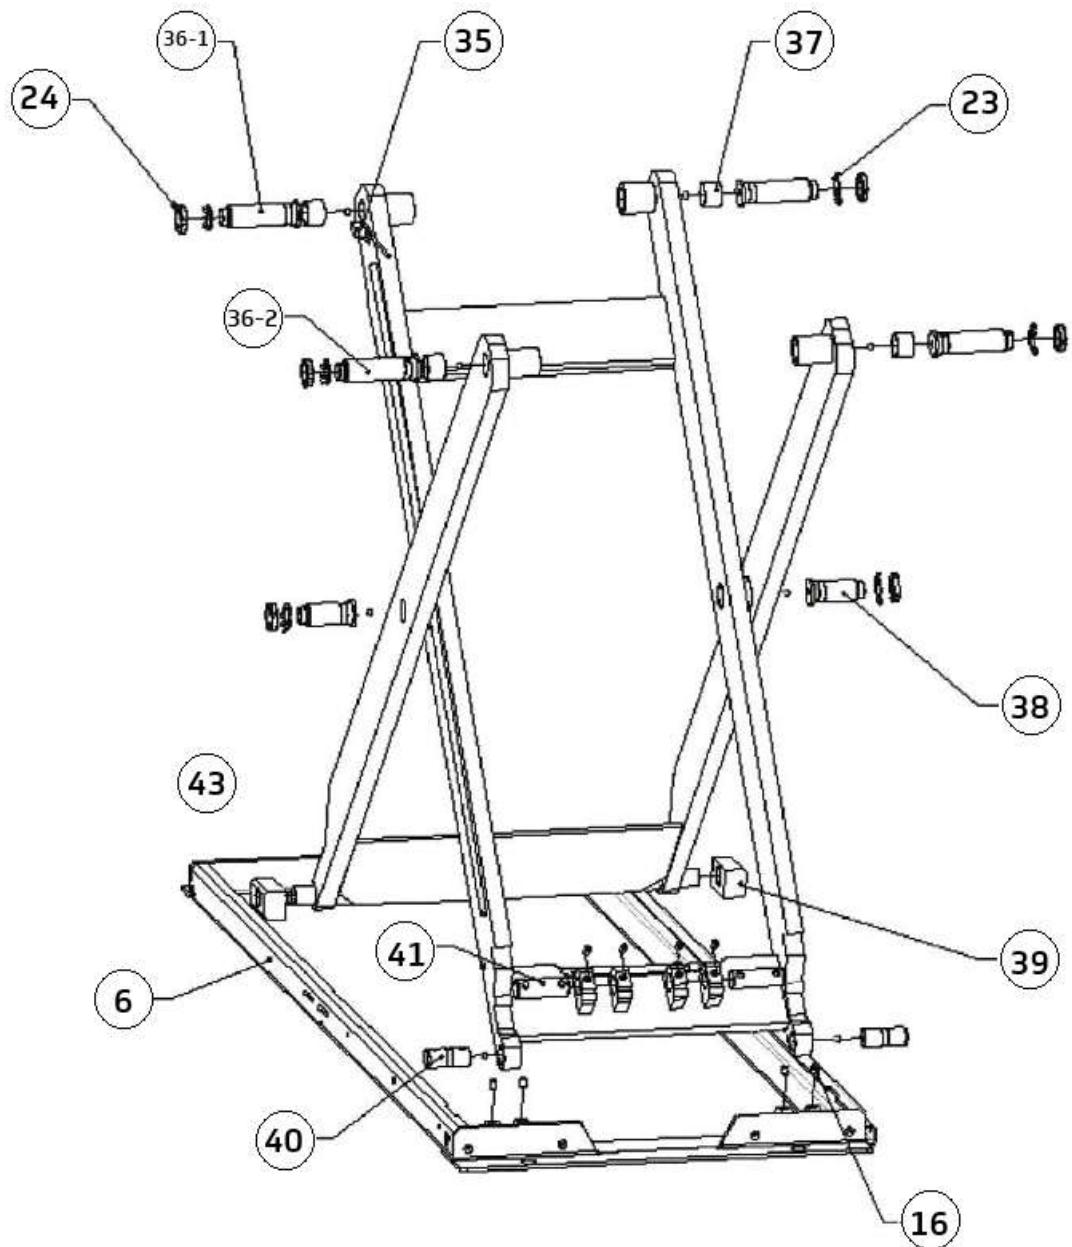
Exploded diagram of platform/ upper shear arm and oil cylinder
